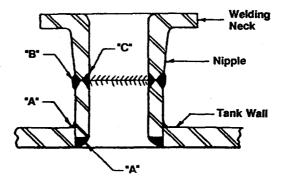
Flanged nipple outlets when welding neck is specified. Weld "B" to be laid in V in beads not to exceed $\frac{3}{16}$ -in. deep. After "B" is built up above plate outside, the inner surface must be routed out sufficiently to remove all scale and slag. Weld "C" is to be built up above the surface of plate, peened, and ground flush.
